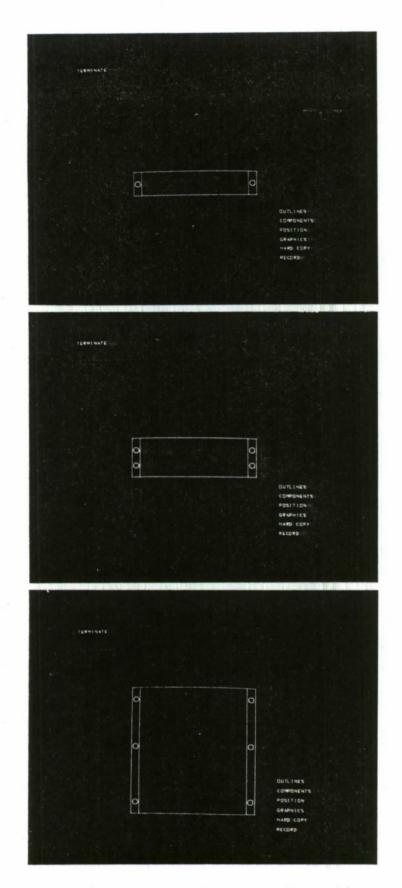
Examples of Standard Panel Outlines with Mounting Holes. Note That the Panel May Get 2, 4, or 6 Mounting Holes Depending on its Size.
